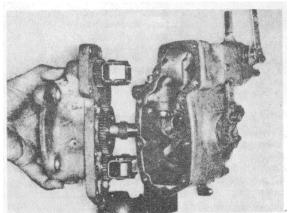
G-65. Installing Front Cover on VS Housing 4. Position plunger drive tang horizontally, position weight carrier horizontally.
